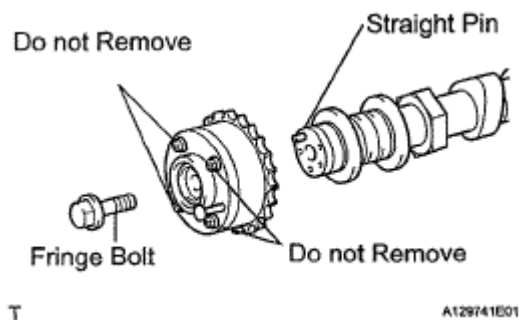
Identifying Fringe Bolt And Camshaft Timing Exhaust Gear
